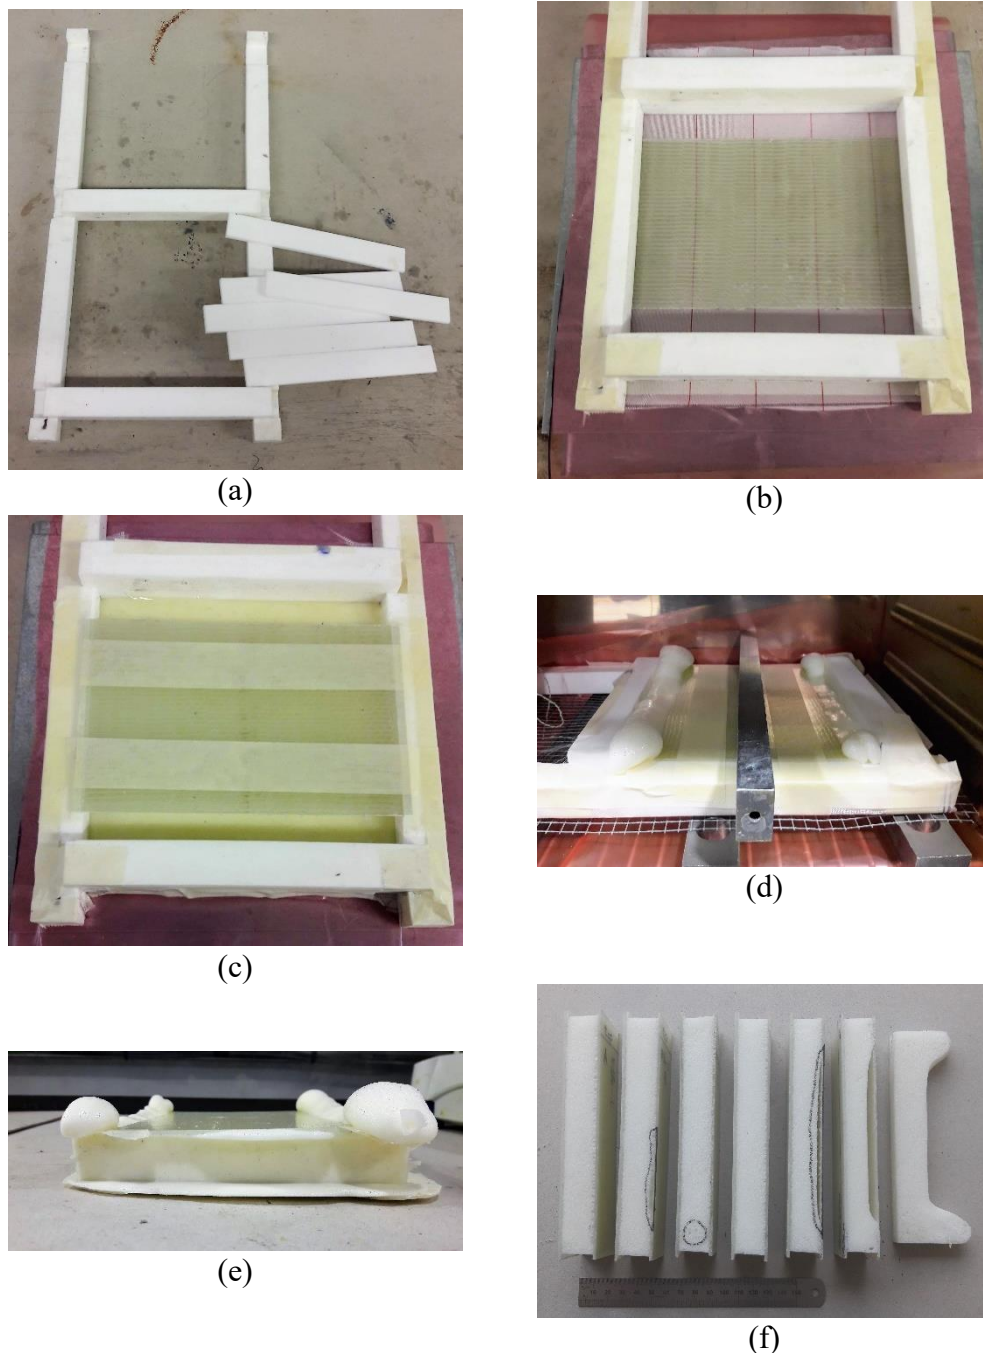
sandwich preparation sequence. (a) mould assembly; (b) setting of bottom face and peel-ply; (c) pouring of pre-foam and setting of the top face; (d) foaming and post-cure in the oven; (e) sandwich removed from the mould; (f) cut sandwich specimens, defects are highlighted.
